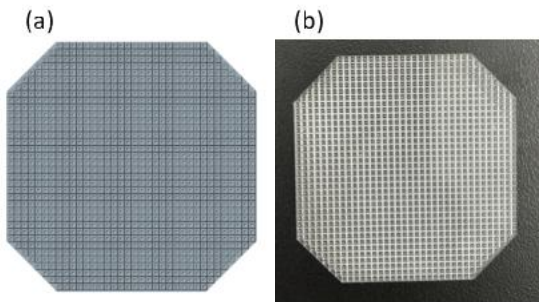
(a), 3D design drawing (b), Physical image of processing.
